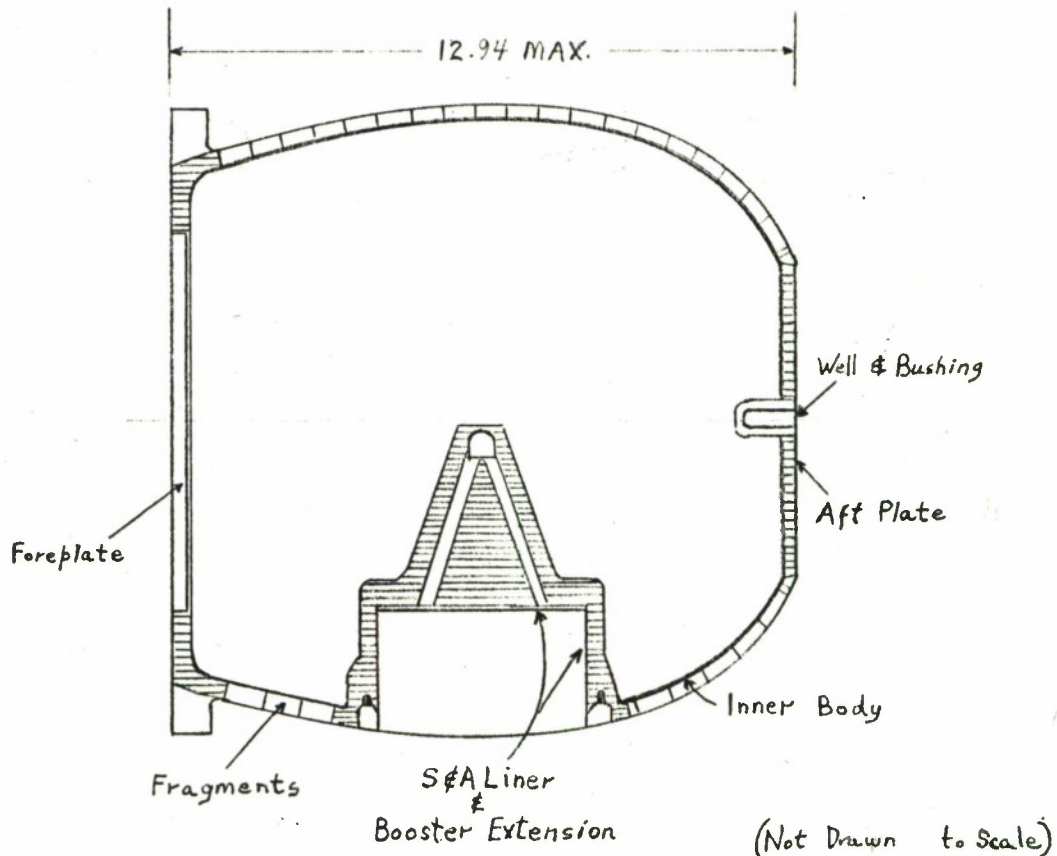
(U): XM5E3 Warhead Inert Parts Assembly.
